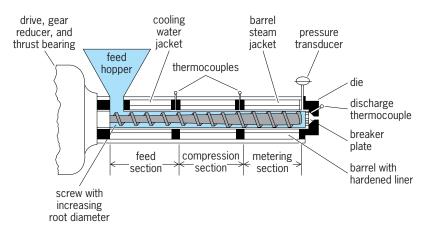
Cross-sectional drawing of a single-screw food extruder. (After J. M. Harper, Extrusion processing of foods, Food Technol., 32(7):67, 1978)
